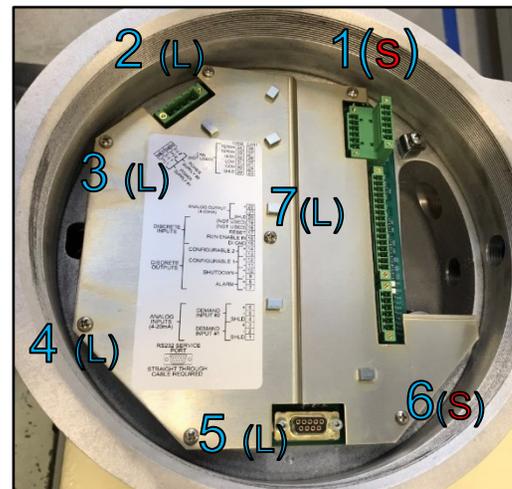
PCB Holding Screws Placement Inside VariStroke
